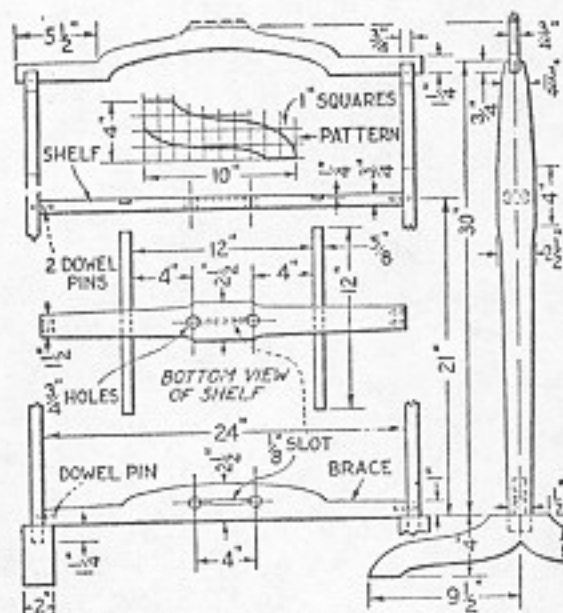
Side and end views of the stand, bottom view of shelf, and pattern for laying out the curves.
